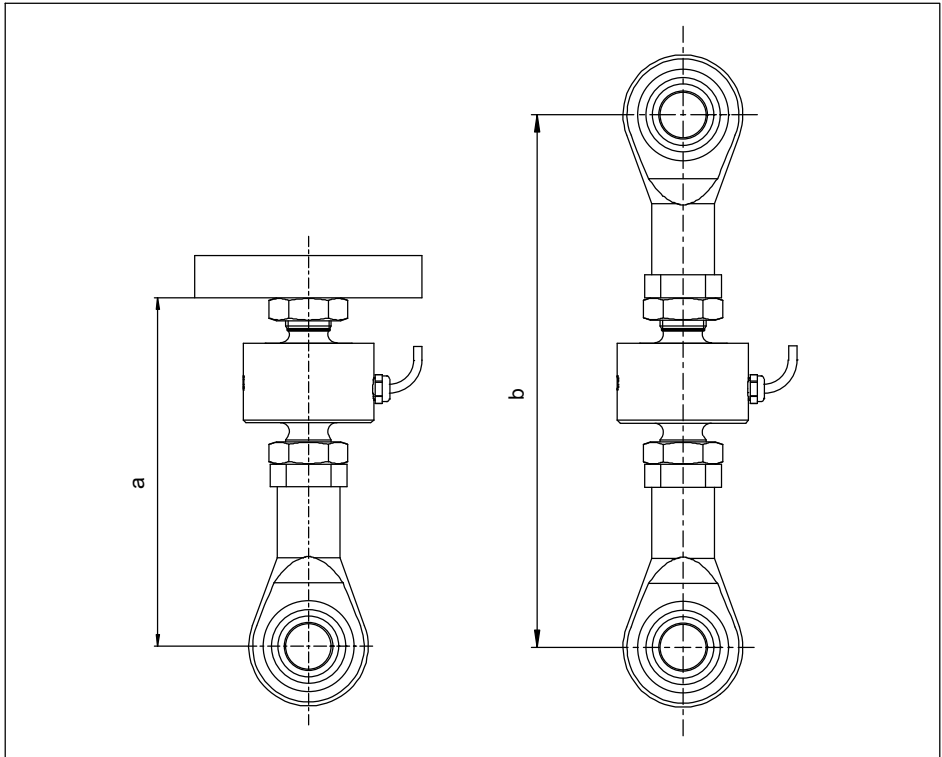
U9C dimensions when using one or two knuckle eyes
